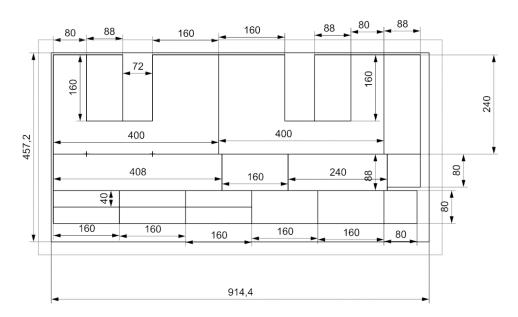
Cutting Layout, all dimensions are in mm.
